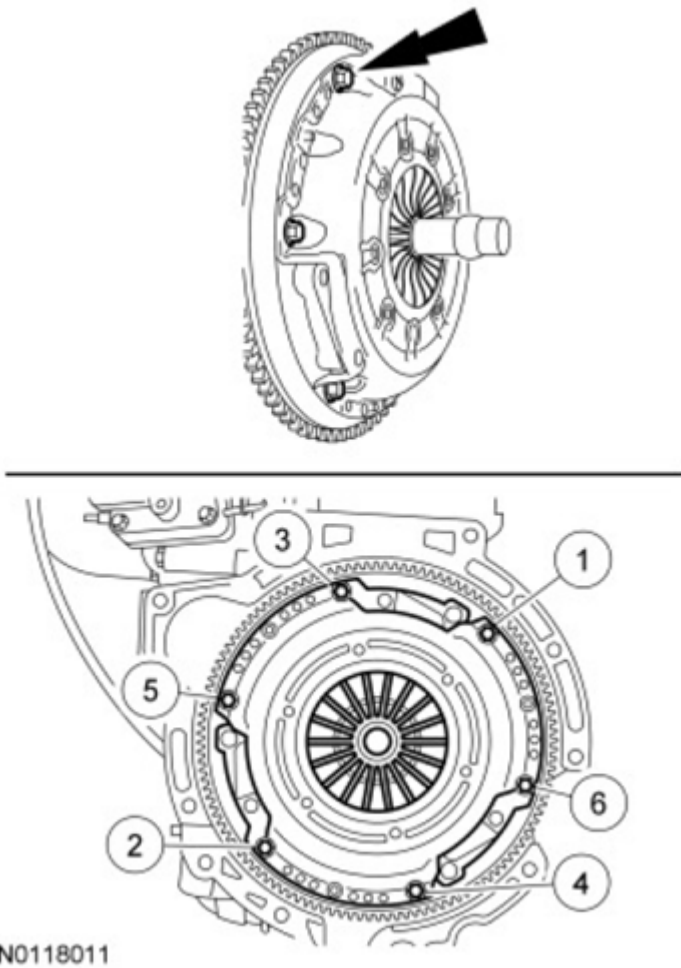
Locating Clutch Pressure Plate-To-Flywheel Bolts
